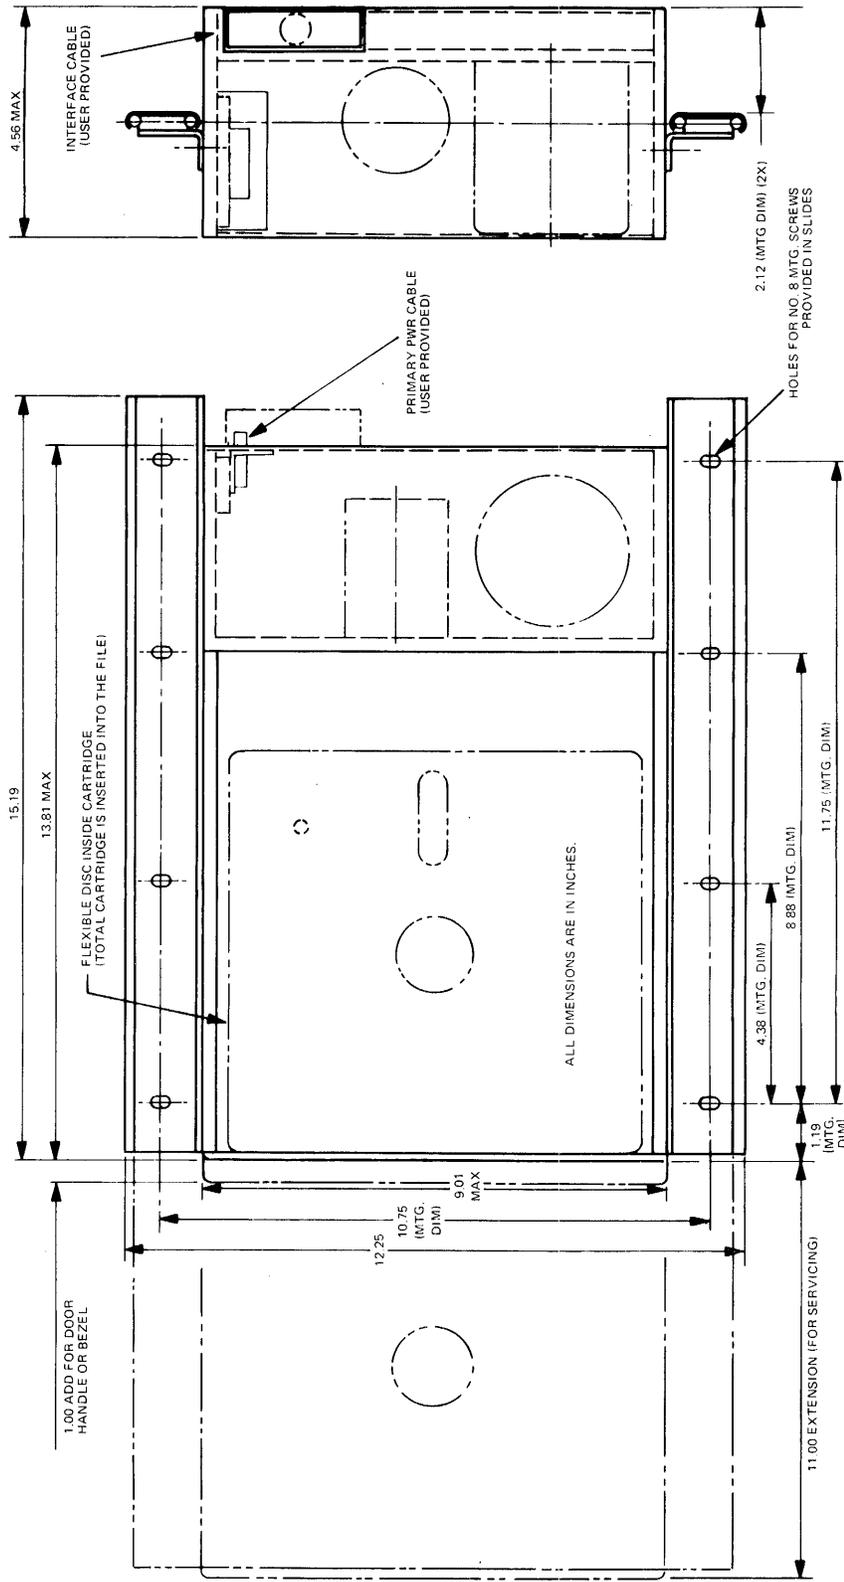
Flexible Disc Mounting Dimensions (Chassis Slides)
